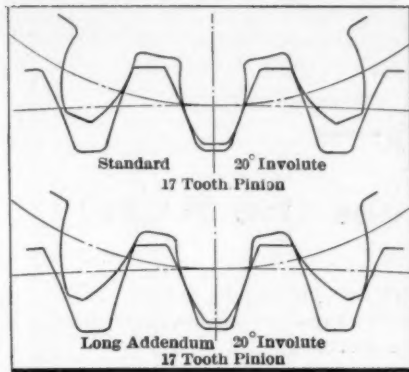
Comparing standard and long addendum 20° involute 17-tooth pinions
